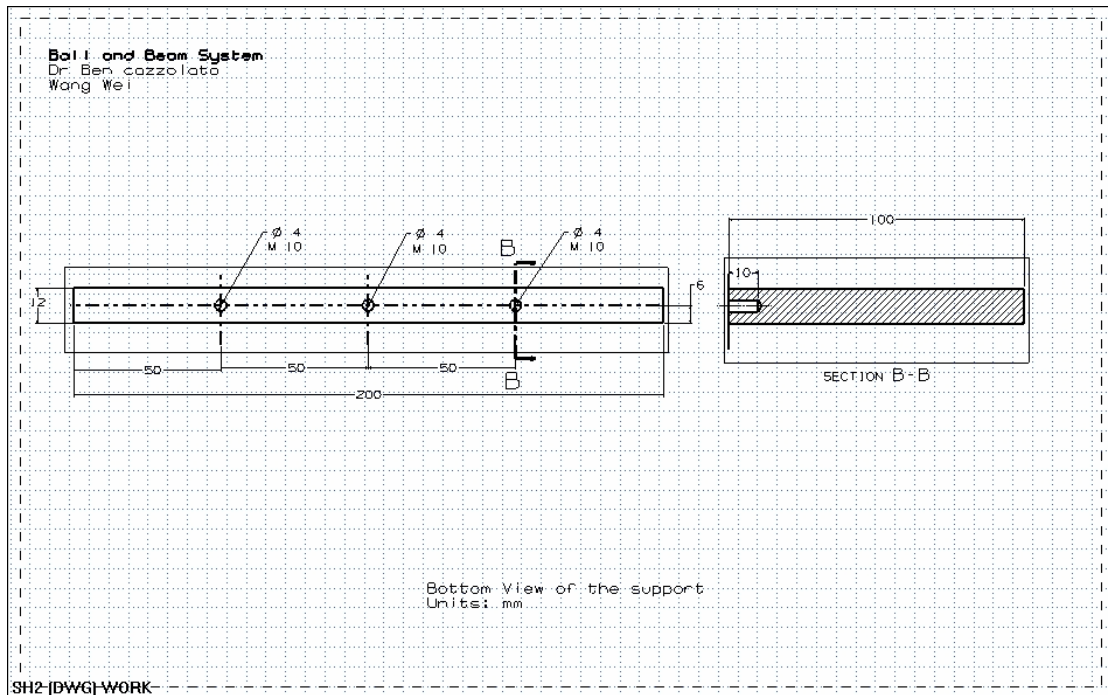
Support drawing (Bottom view) in (mm) (Solid Edge V19 2006)
